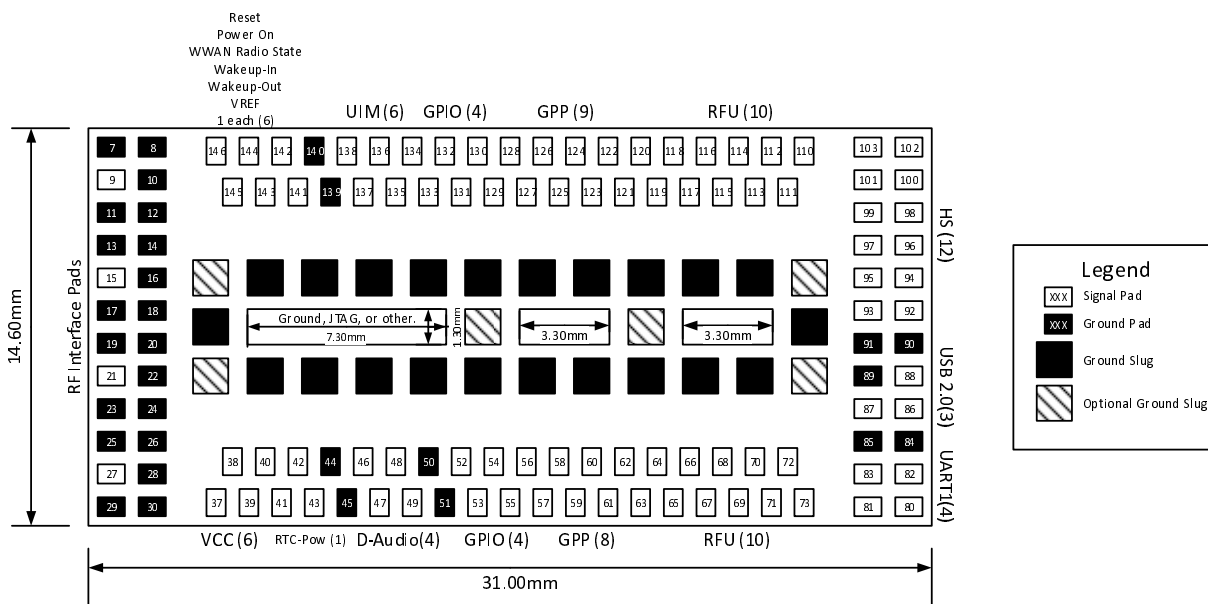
SMT3115 black and white physical form factor (452 mm<sup>2</sup>), dimensions, pad numbering and placement
